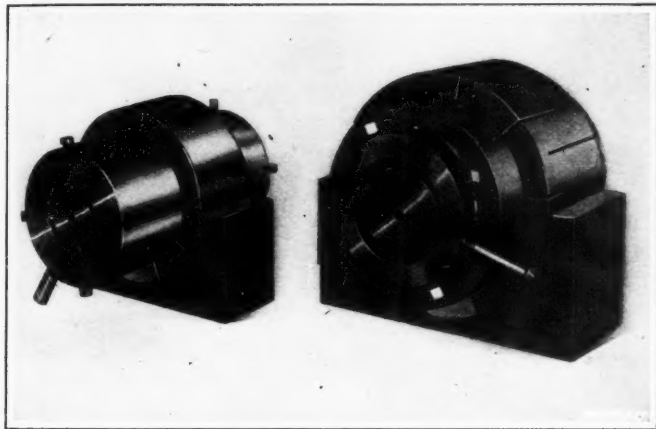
Expanding Arbor with Adjustable Center for turning Eccentric Bushings
